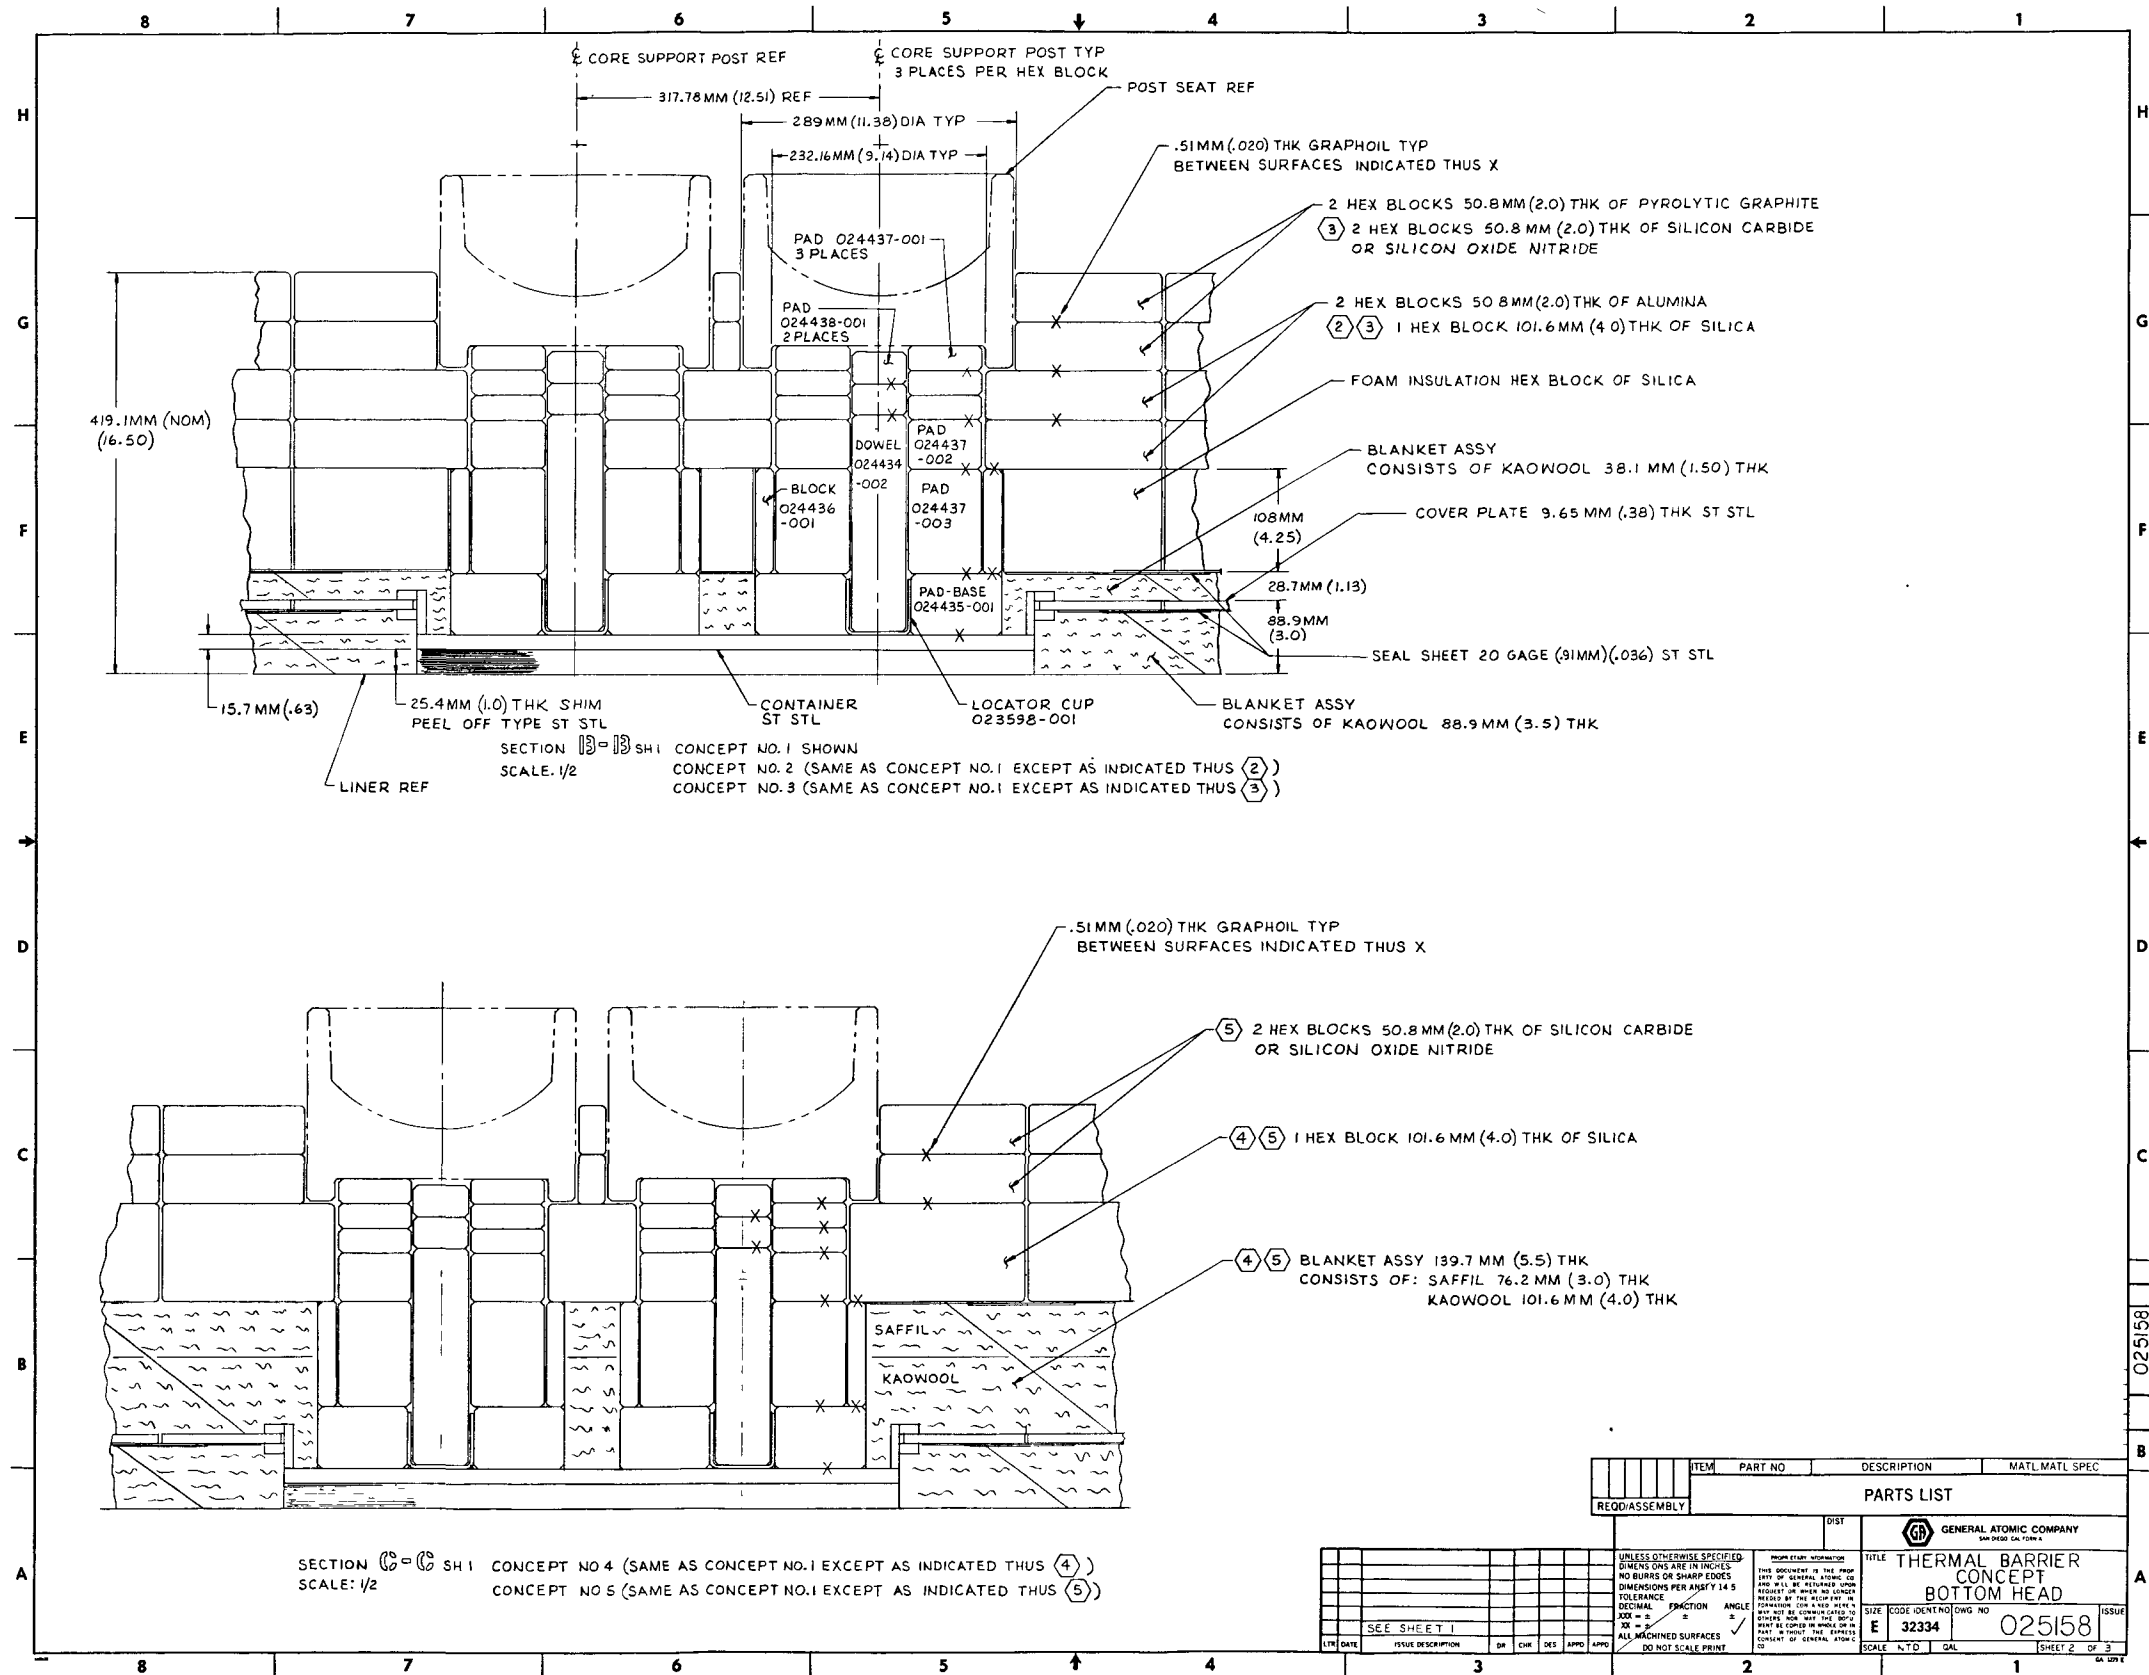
Thermal barrier bottom head (sheet 2 of 3)
